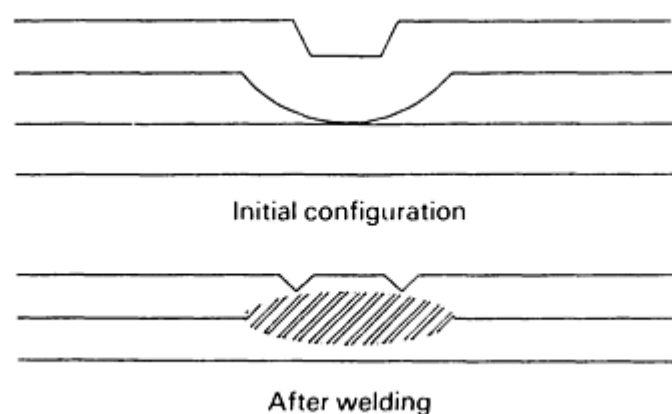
TYPICAL STACKED CONFIGURATION FOR EMBOSSED-PROJECTION WELDING OF SHEET
